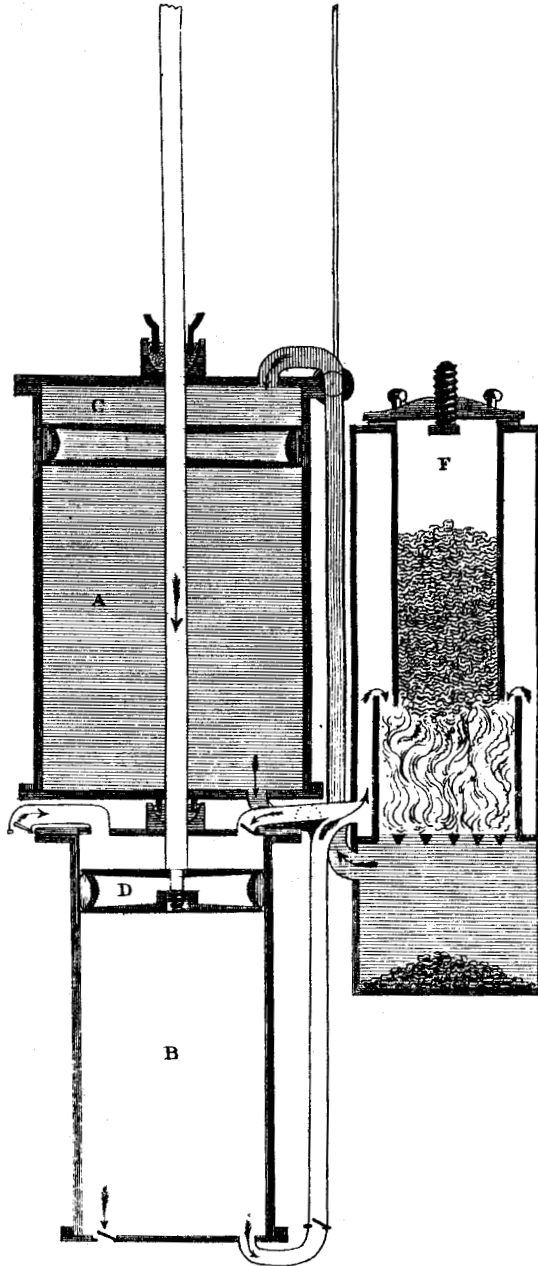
Early continuous combustion air engine. After Cayley (1807)
